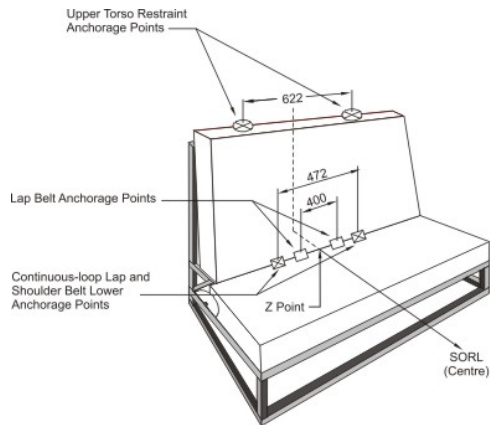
Three-dimensional Schematic View of Standard Seat Assembly Indicating Location of Seat Belt Anchorage Points
